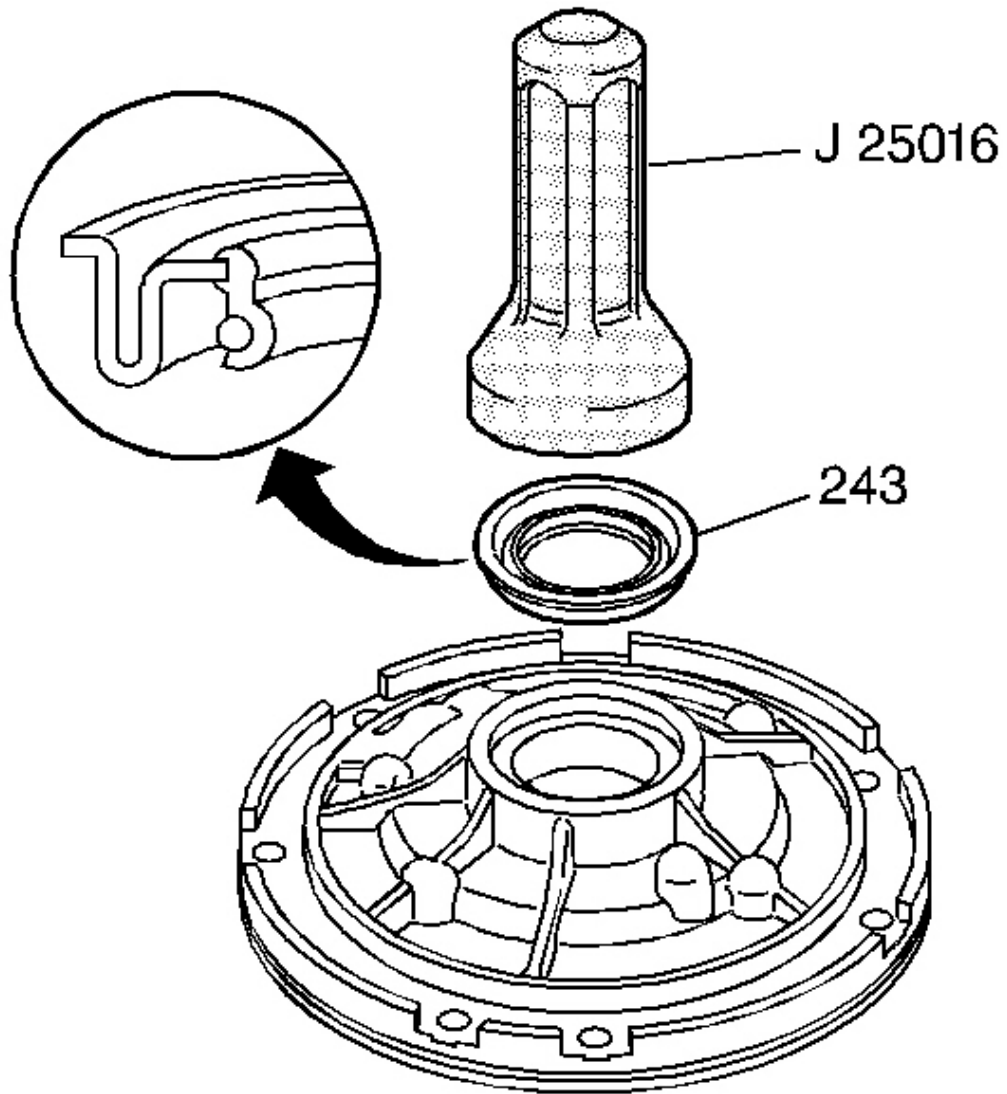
Using J 25016 To Install Oil Seal Assembly
